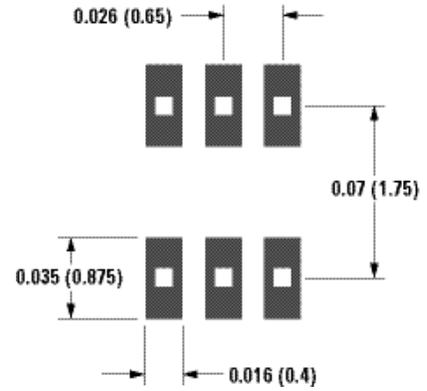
PCB Pad Layout. Dimensions are in inches (millimeters).
